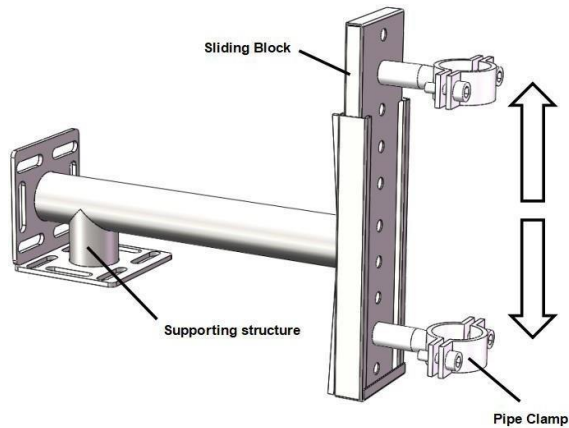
B Submersion Adapter Mounting Bracket
